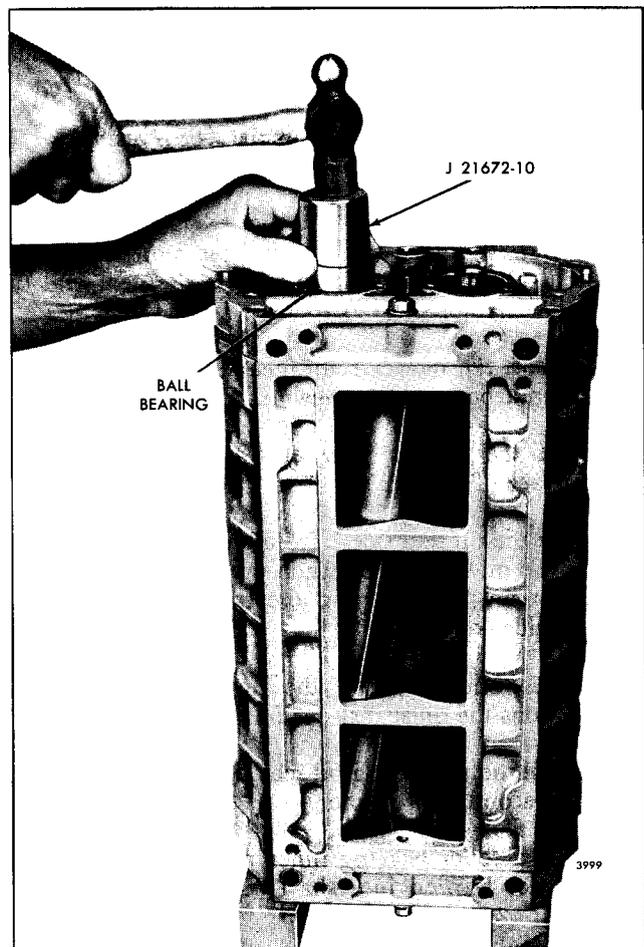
Installing Ball Bearings on Rotor Shafts and in Front End Plate (Former Blower)
